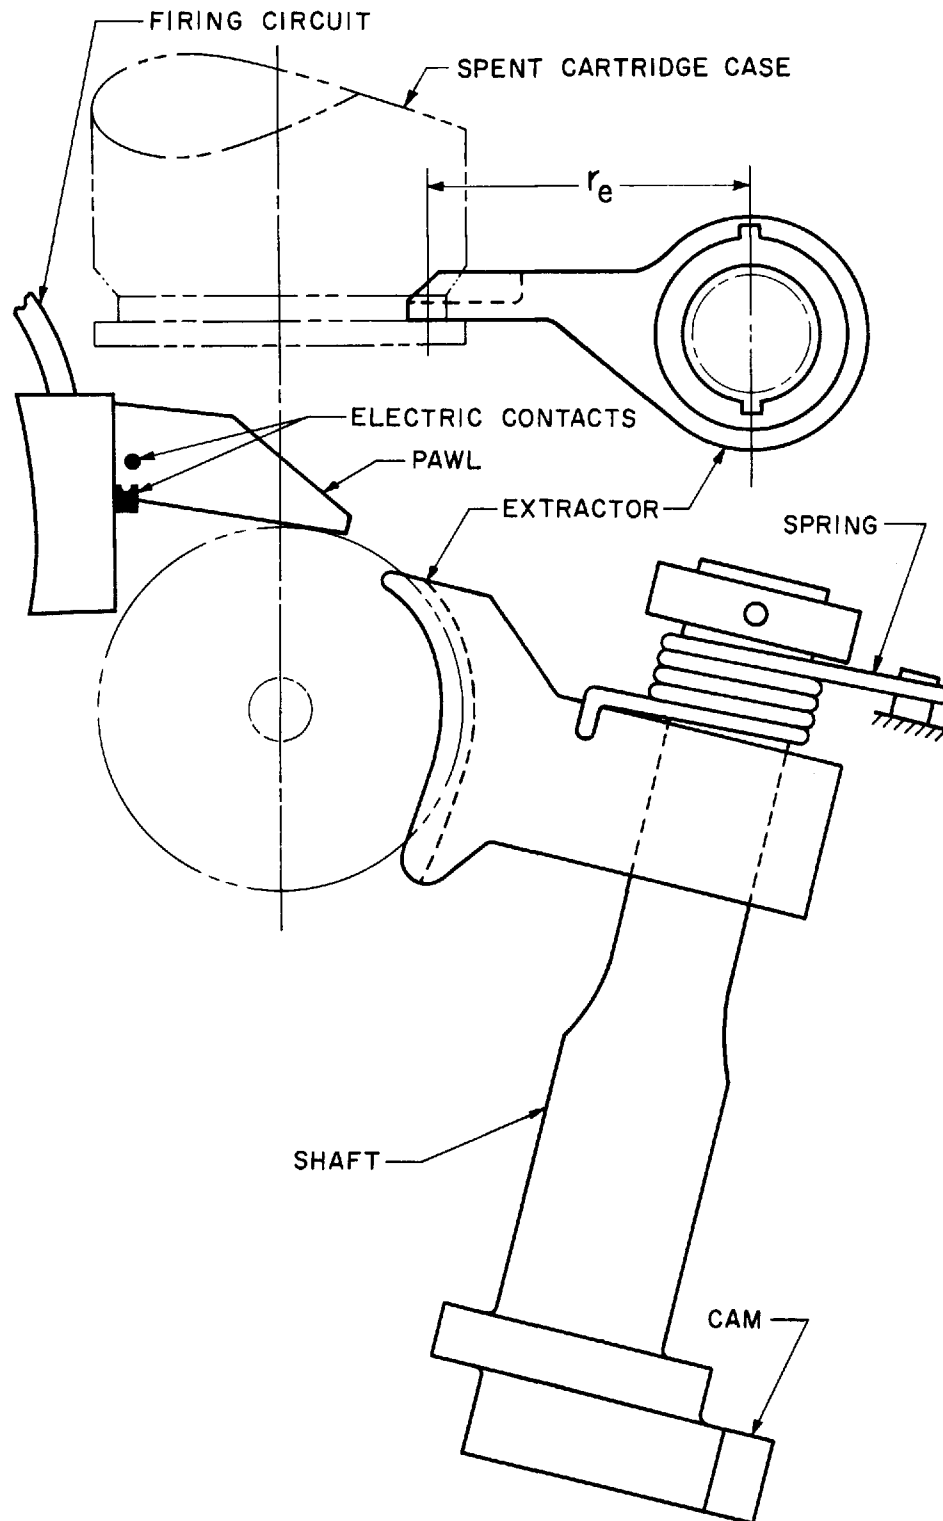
Extractor Assembly With Antidouble Feed Mechanism
